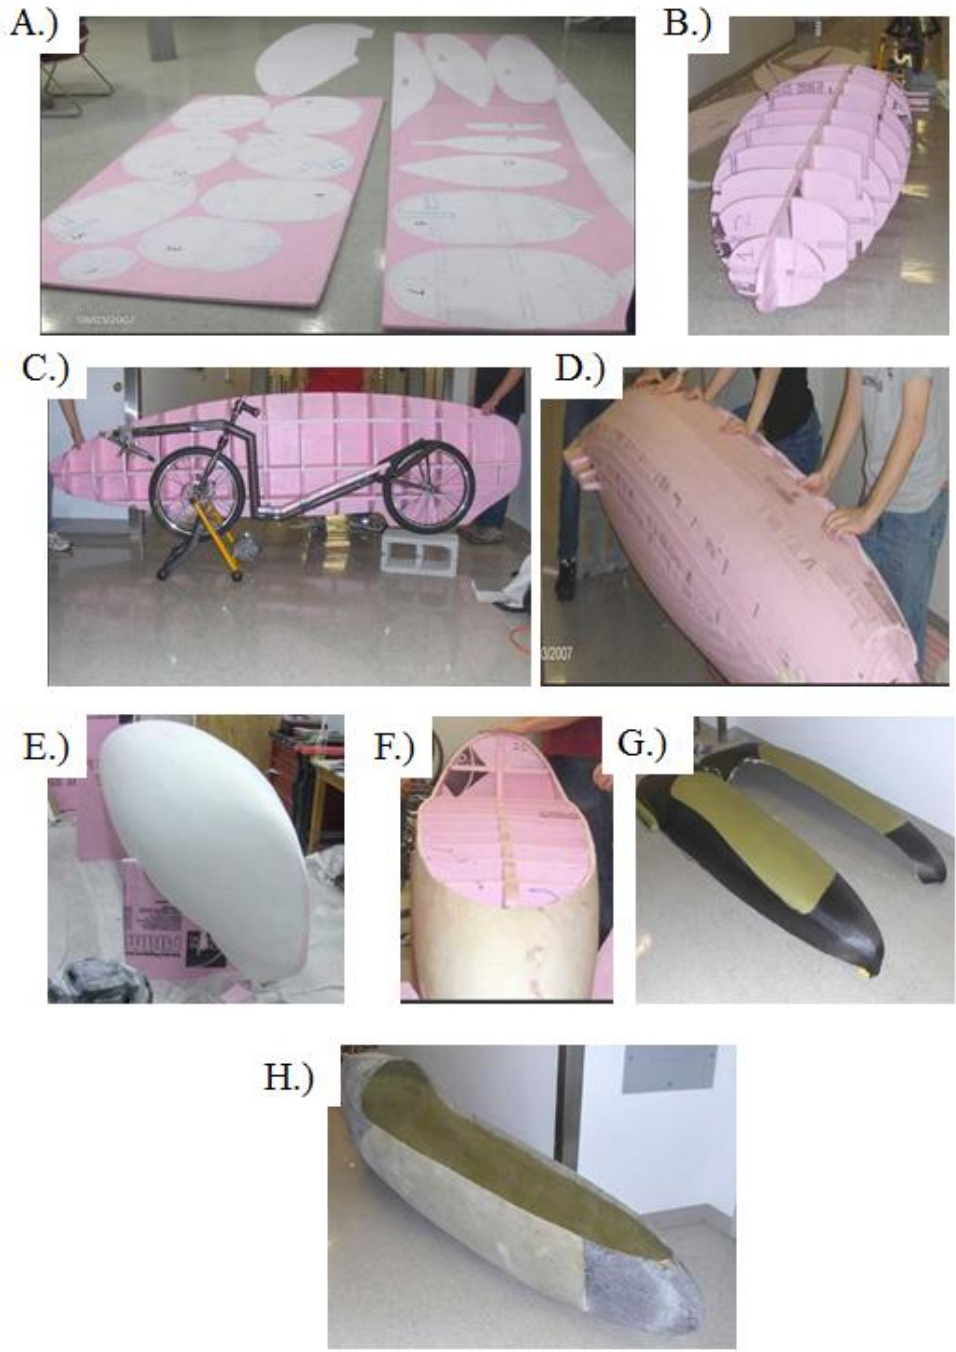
Overview of Rose Hulman mold creation 2007 A.) Layout of mold cross sections on foam sheets B.) Assembly of cross section C.) Initial mold to HPV comparison D.) Layering foam strips over mold skeleton E.) Smoothed mold F.) Shaped mold with removal of unnecessary mold sections G.) Composite halves created from mold H.) Combined mold halves and finished fairing product [39]
